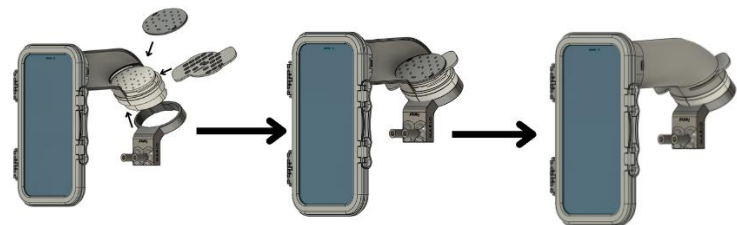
The full assembly of the M.A.R.I.O device, showcasing the positions of each component
